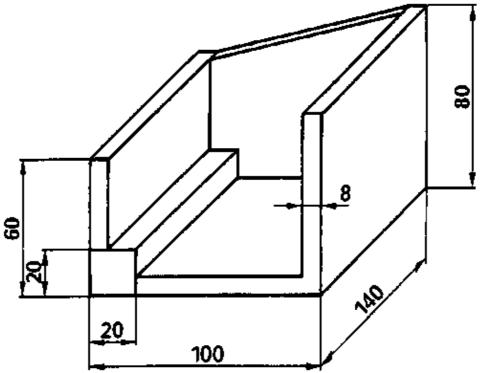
Example 3 of dimensioning (frontal perspective)
